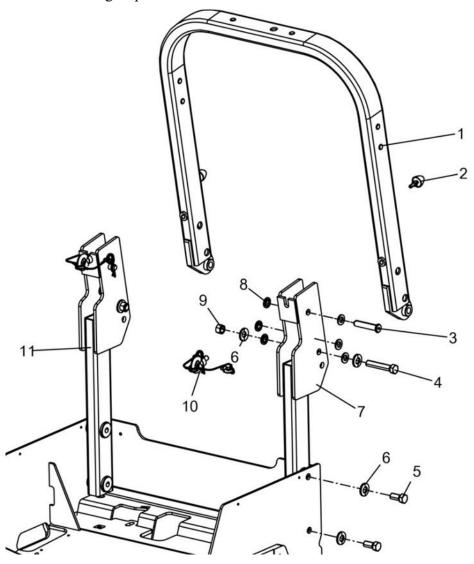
ROPS: all parts used for ROPS position must be intact
